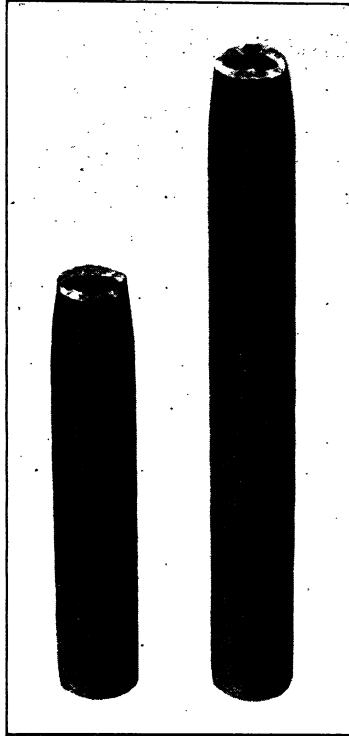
Tensile Test on 3-inch Diameter Steel Tube. Breaking load 98.4 tons.
